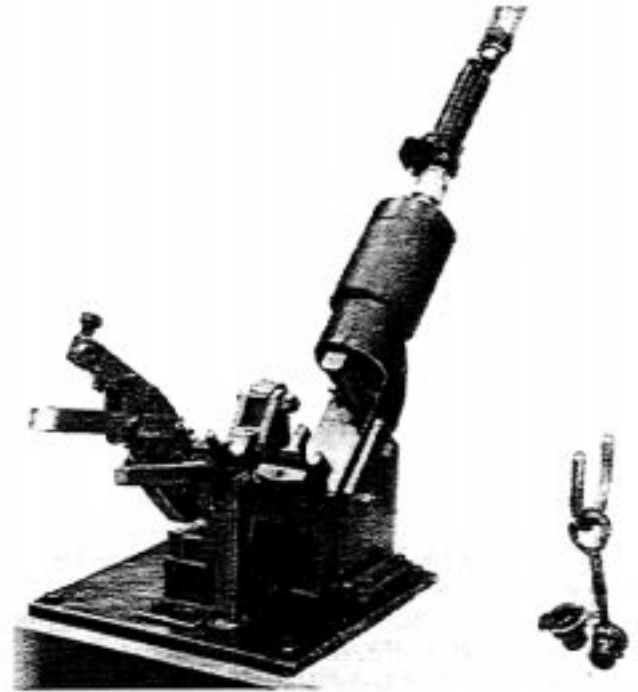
Amp, Inc. Electro-Hydraulic Crimping Tool
